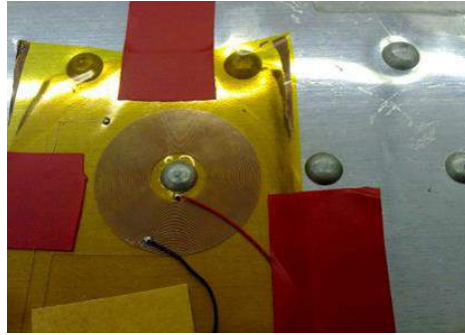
Flat coil sensor attached (the tape is used here for demonstrative purposes) on an aluminium sheet with rivet connections. The sensor fits exactly on top of a rivet and monitors a possible crack appearance.
